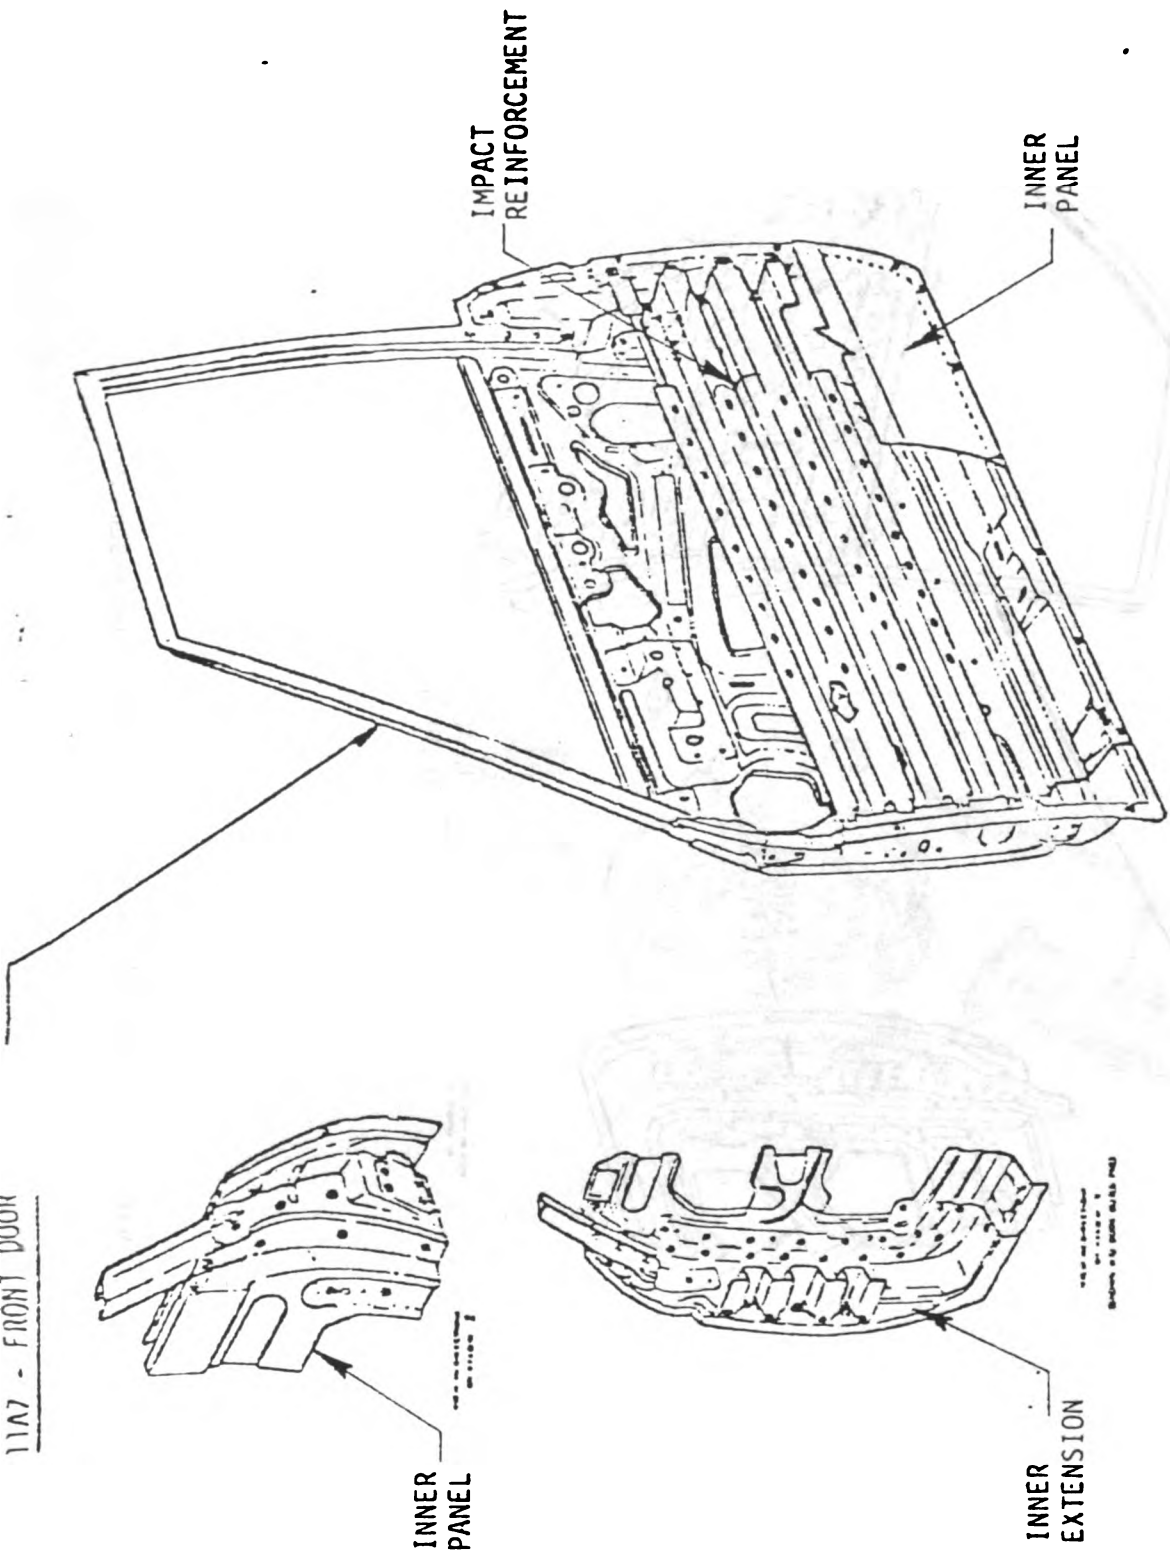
1978 OMNI Front Door - Complete Assembly
